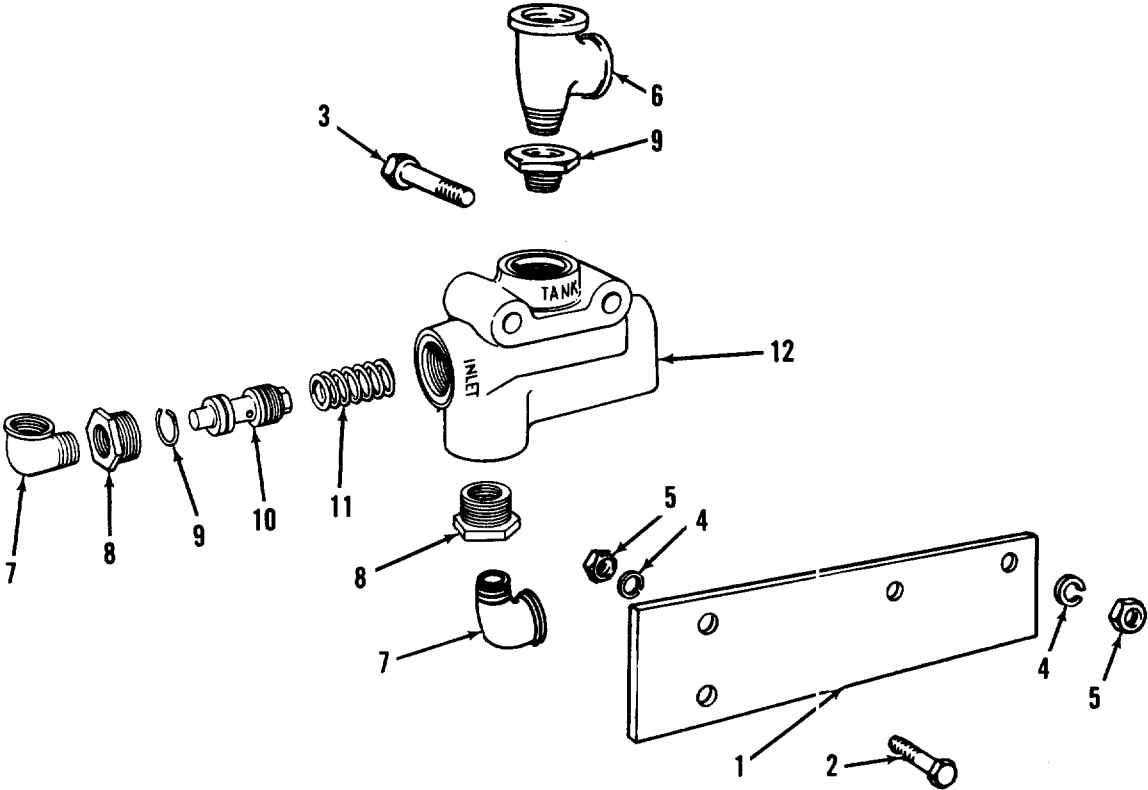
Front valve drag link assembly (Sheet 2 of 2)
